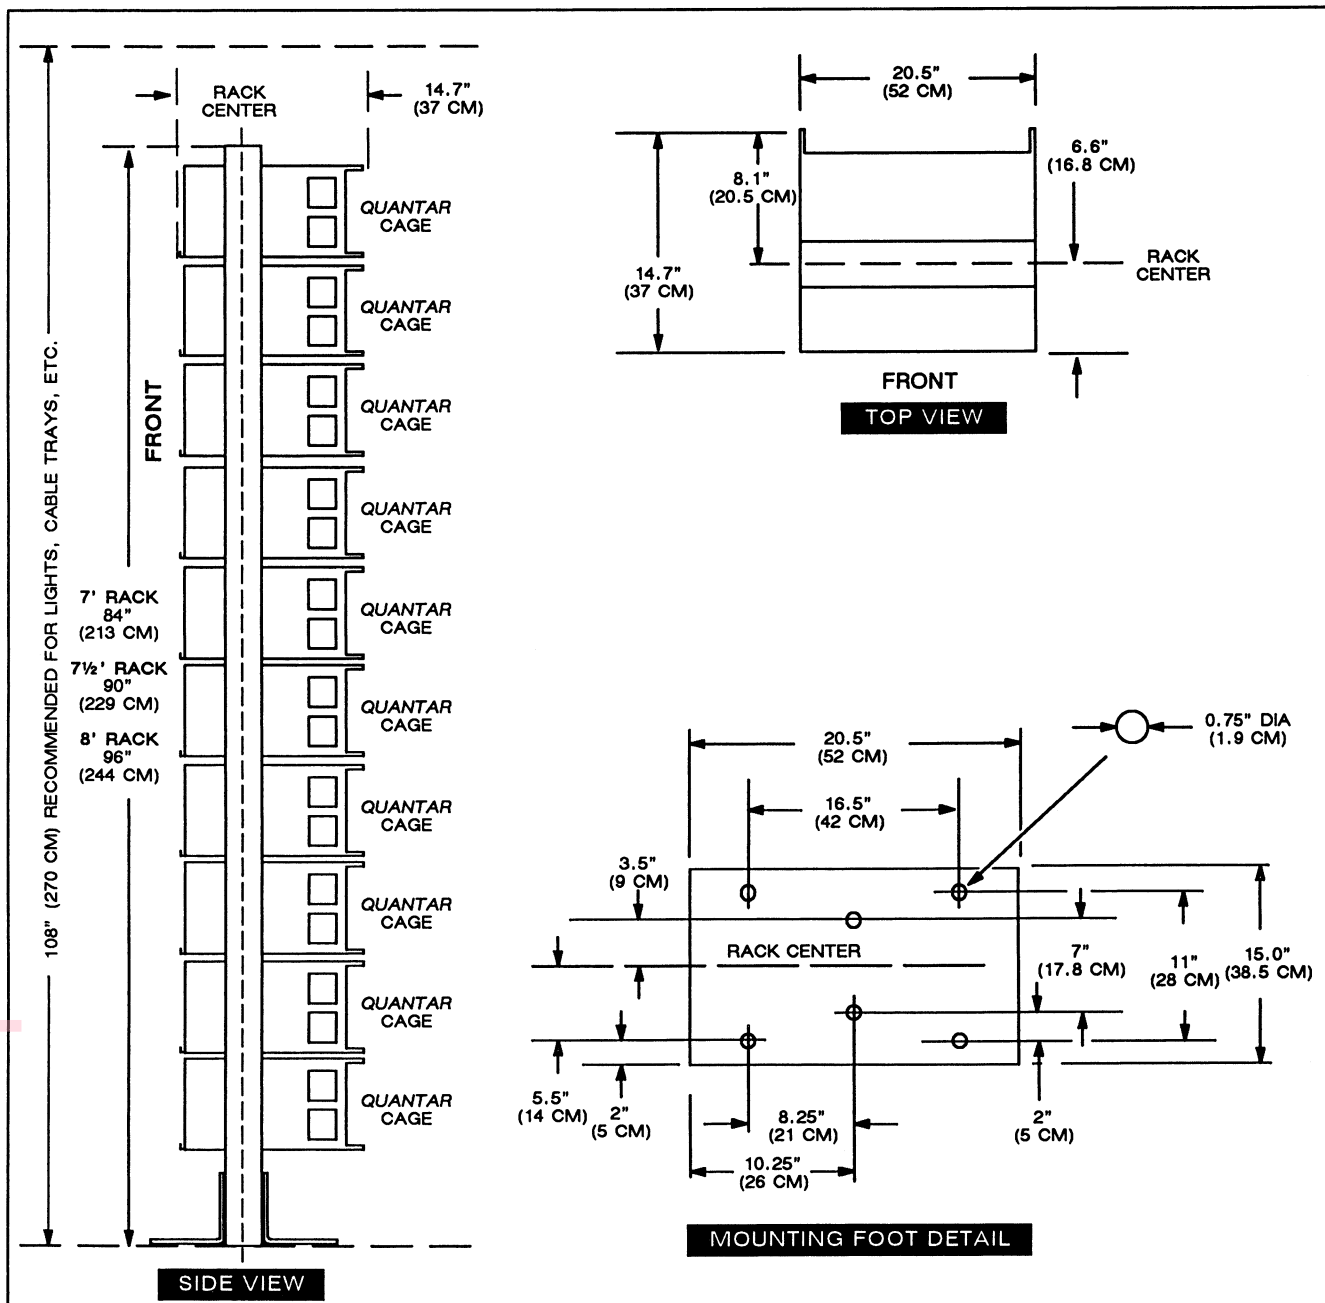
Dimensions and Clearances for 7', 7½', and 8' Racks
